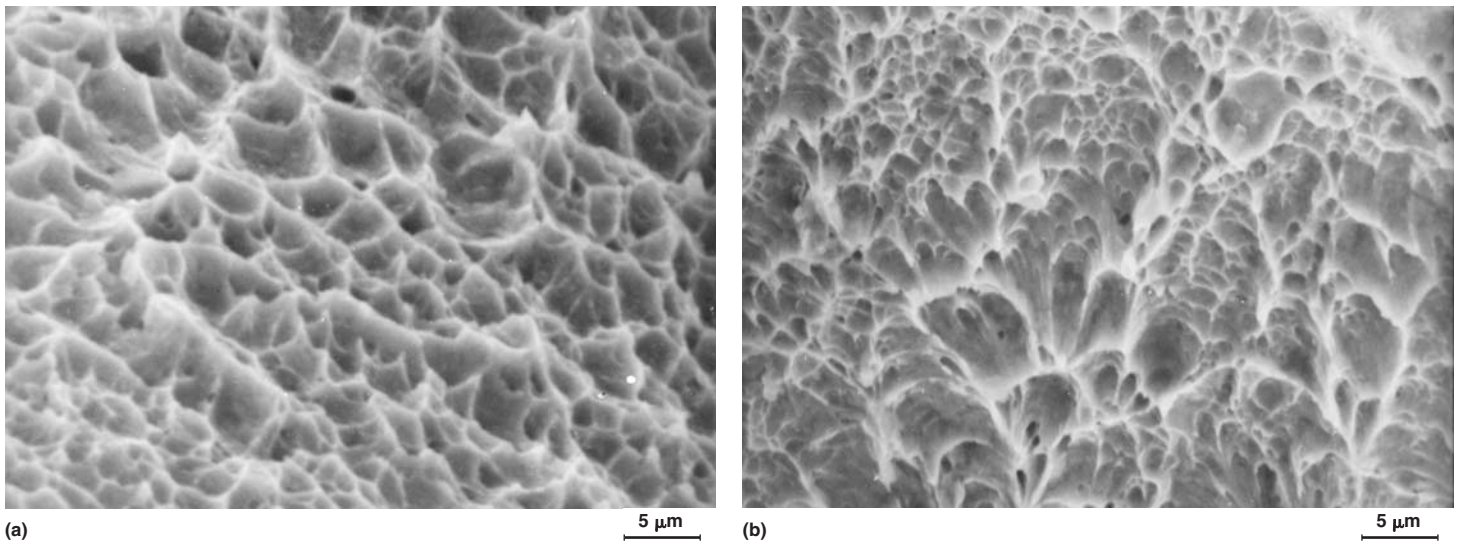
(a) SEM fractograph of bolt M-2 showing equiaxed dimples at the core. (b) SEM fractograph of bolt showing elongated dimples close to the edge
